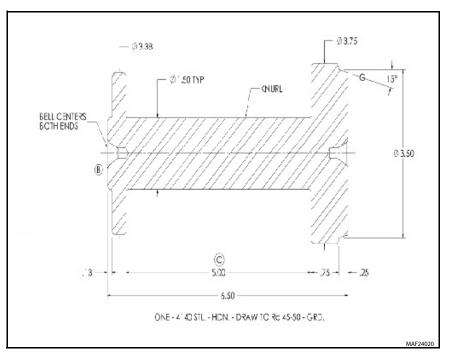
Bearing Cup Pressing Tool (T155291)
